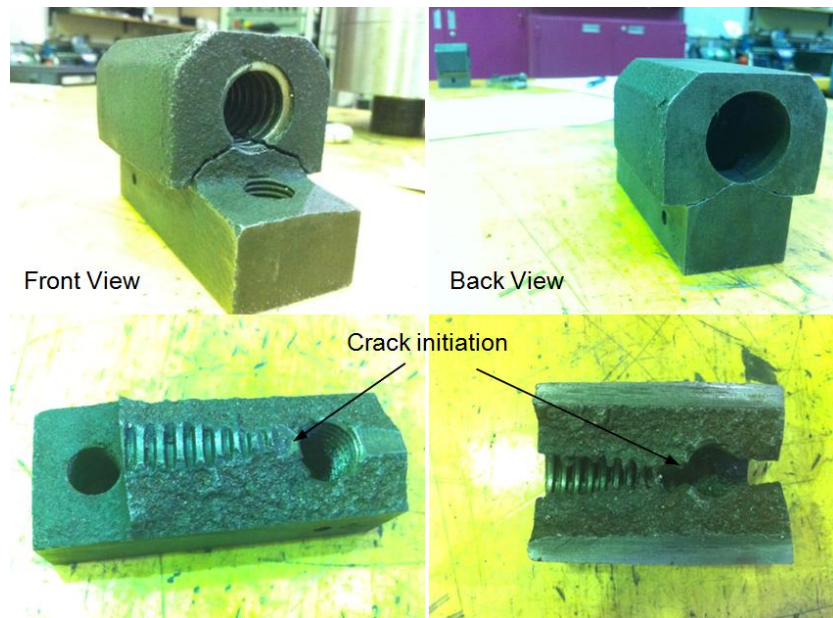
Movable vise jaw shown the location of crack initiation
